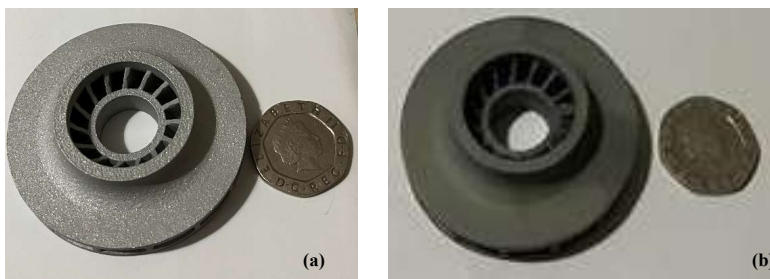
Impeller (a) (Alsi10mg) Aluminium (b) 316L stainless steel
